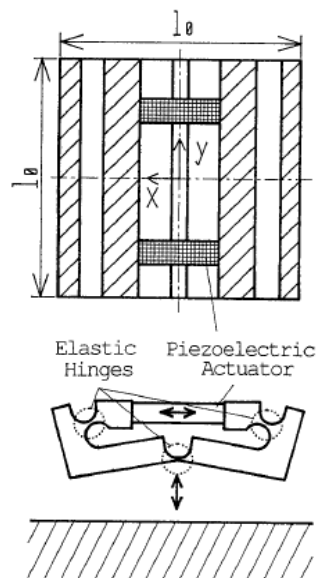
Squeeze film air bearing with elastic hinges [21].
